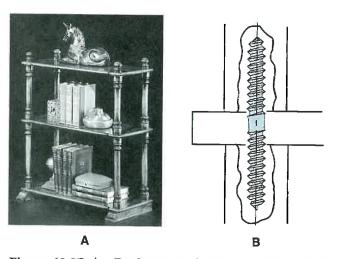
A—Bookcase made by assembling shelves and spindles. (*Butler*) B—Select dowel screws to connect the spindles.
